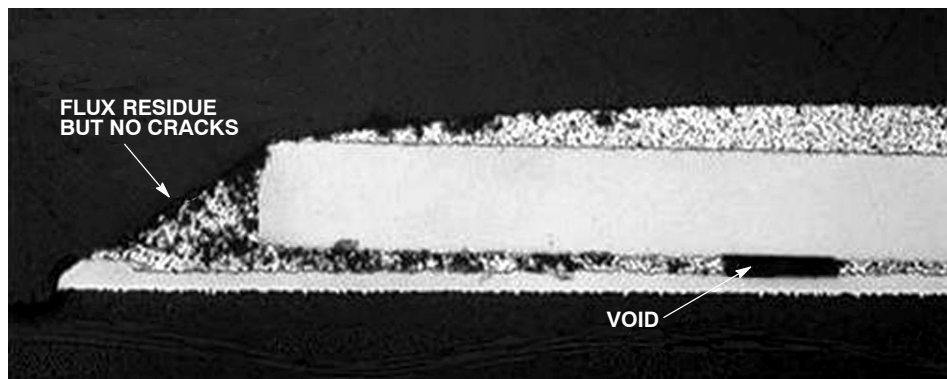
Solder Joint Cross-section Using SnPb Alloy
